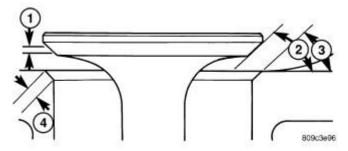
Valve Face & Seat Courtesy of CHRYSLER LLC
